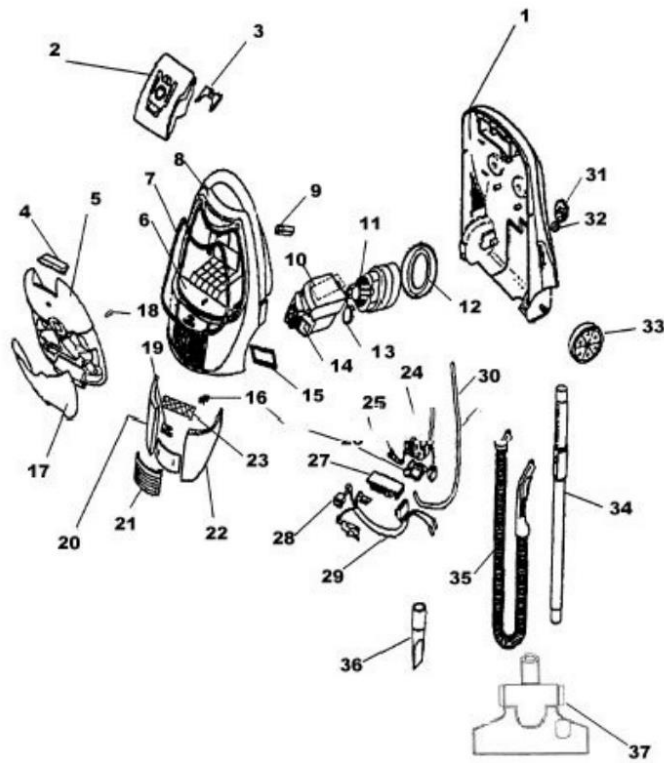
Exploded drawing and spare parts listing for the canister vacuum cleaner
